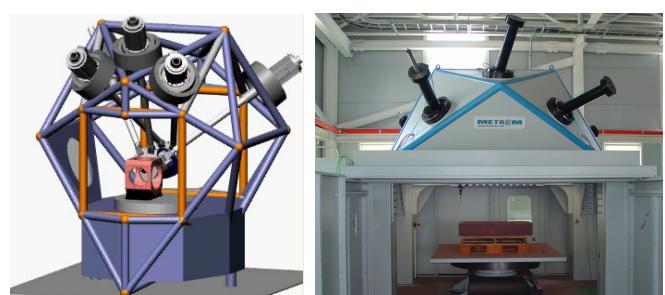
Schematic and outward appearance of CNC 5-axes milling machining center for sand molds.
